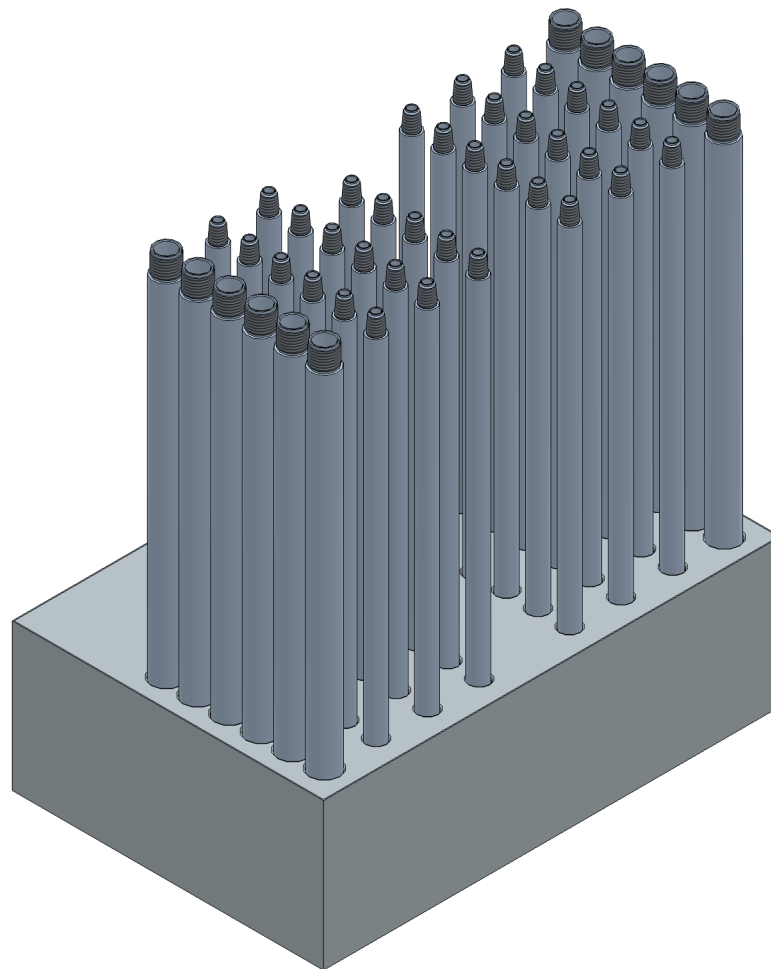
Rectangular Tube Storage With 12 Casing Tubes And 36 Standard Tubes.
